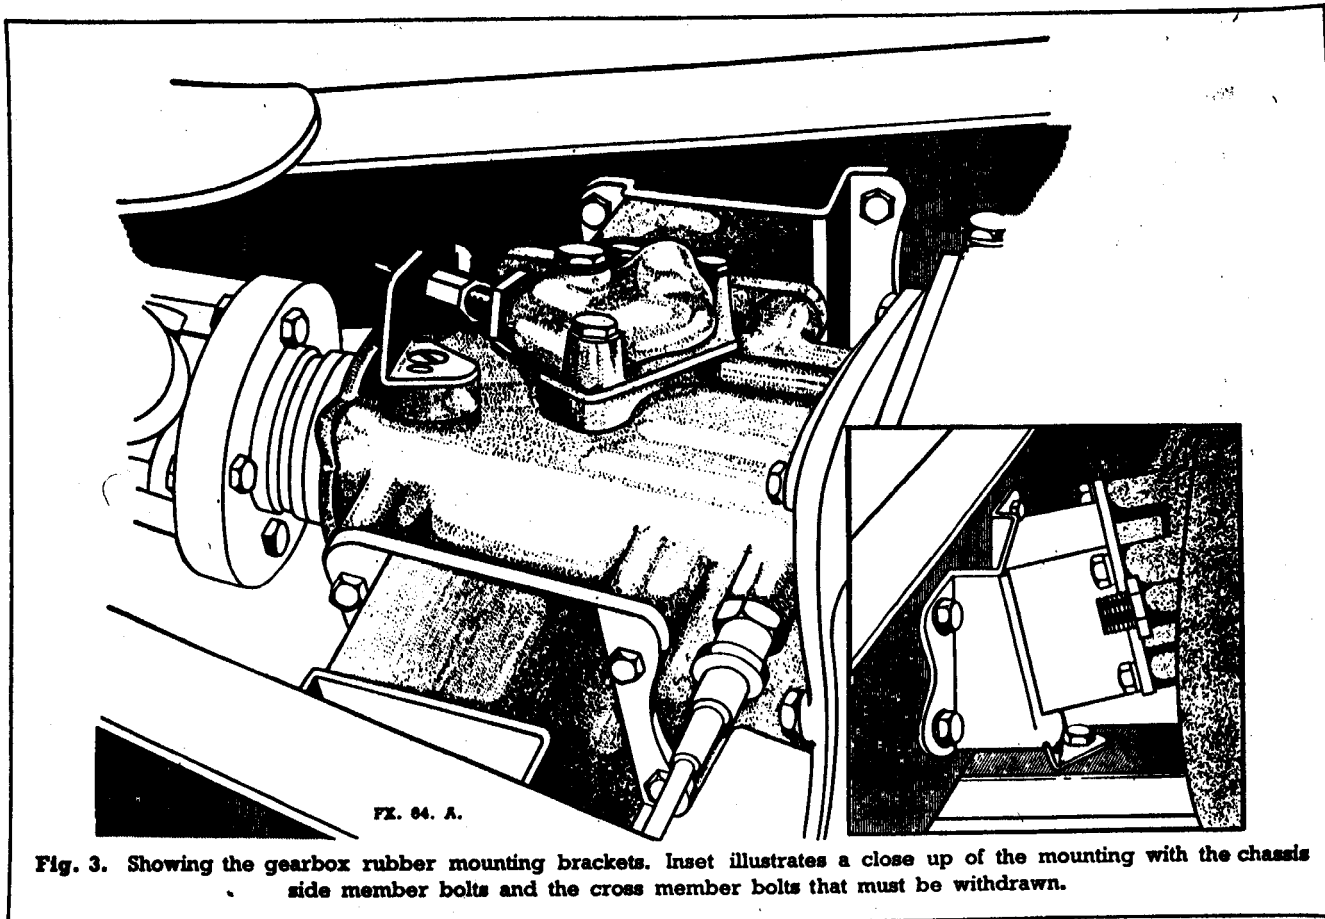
Showing the gearbox rubber mounting brackets. Inset illustrates a close up of the mounting with the chassis side member bolts and the cross member bolts that must be withdrawn.
